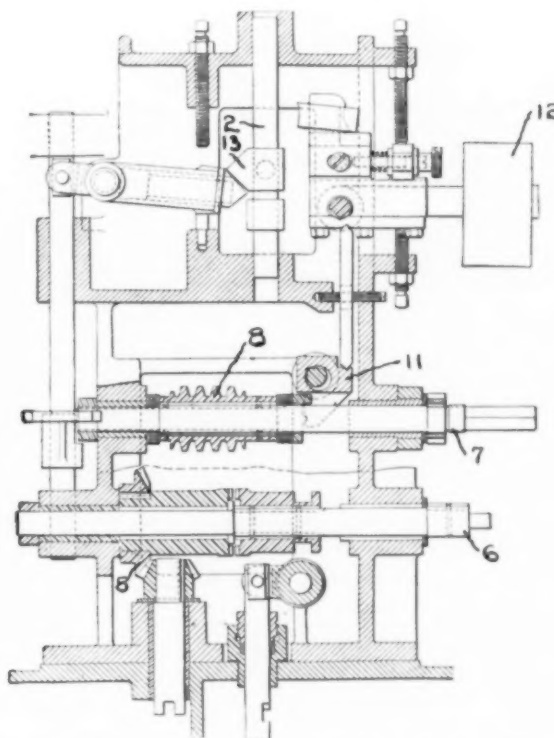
TOOL DEVICE HAVING THE FEATURE OF TRIPPING THE FEED IF PRESSURE ON TOOL BECOMES EXCESSIVE.
